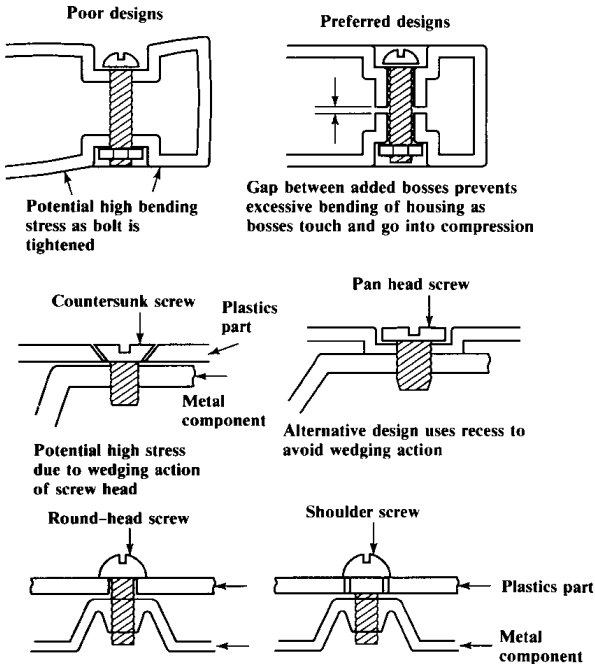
Examples of Poor and Good Designs Used for Assembly of Plastics Parts with Metal Fasteners
